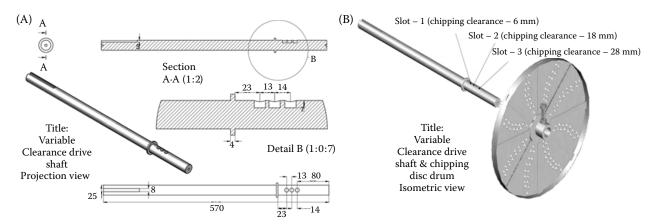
Detailed projection (A) and isometric (B) views of the main drive shaft depicting the three chipping clearances
